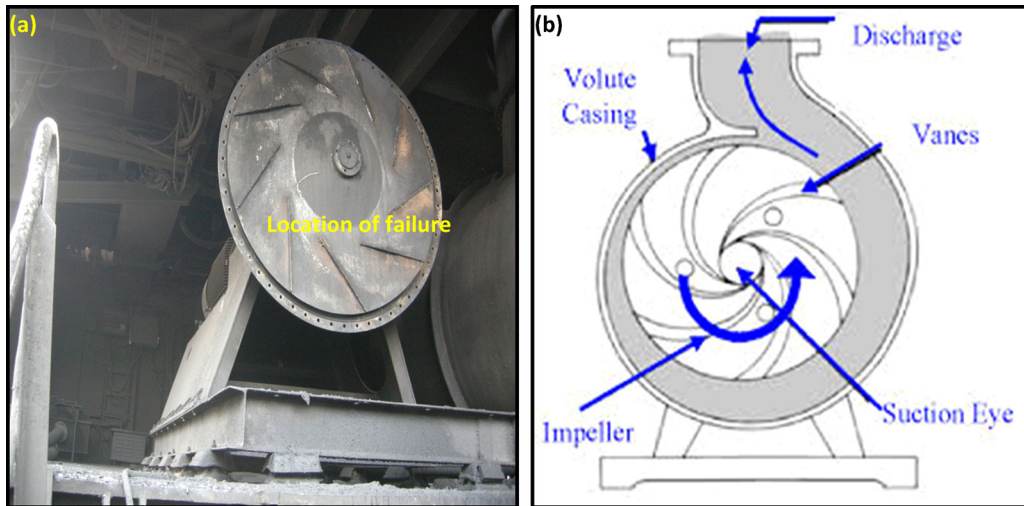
(a) The assembly site of the failed impeller; (b) schematic drawing of the impeller.
